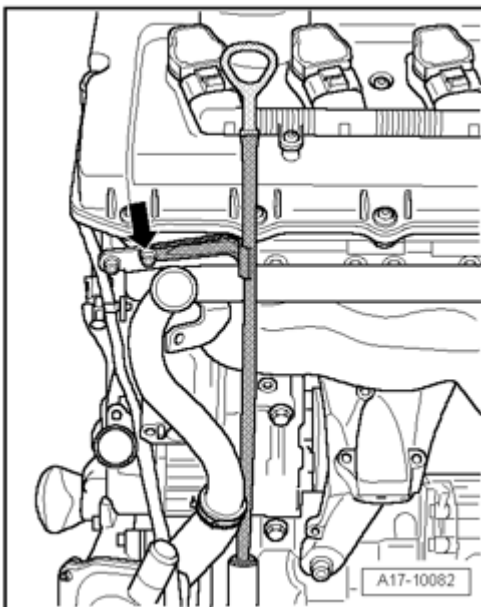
Removing Guide Pipe For Oil Dipstick At Cylinder Head
